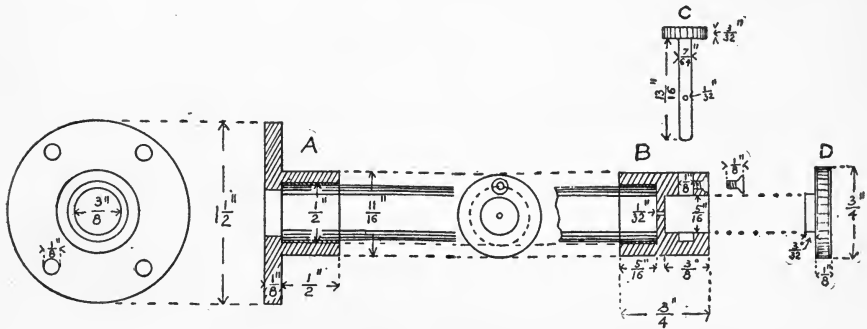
DETAILS OF SUSPENSION TUBE.
